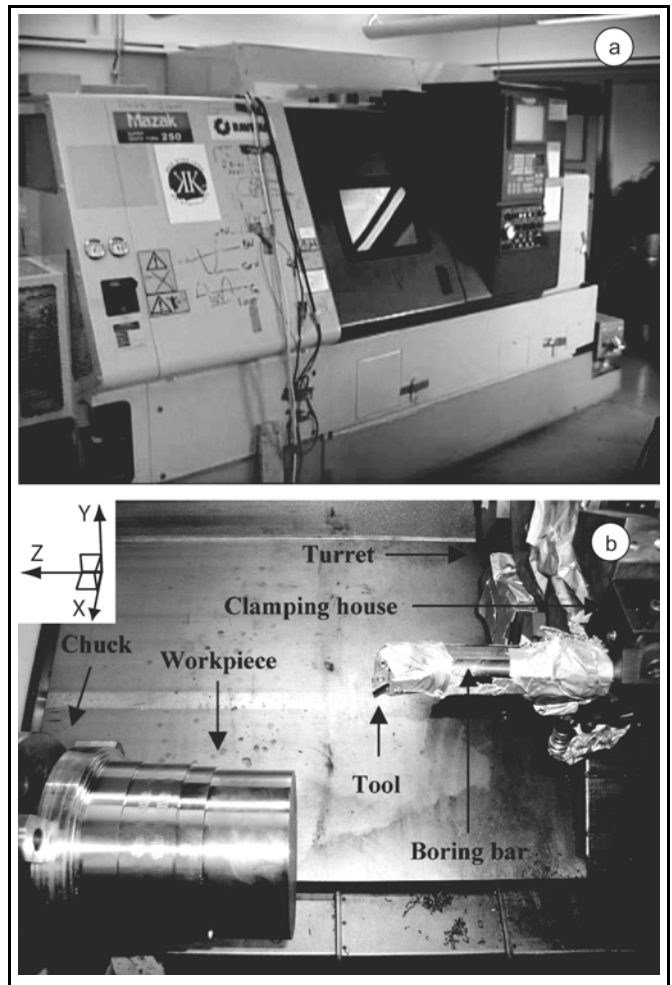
(a) Mazak SUPER QUICK TURN - 250M CNC lathe and (b) the room in the lathe where the machining is carried out.
